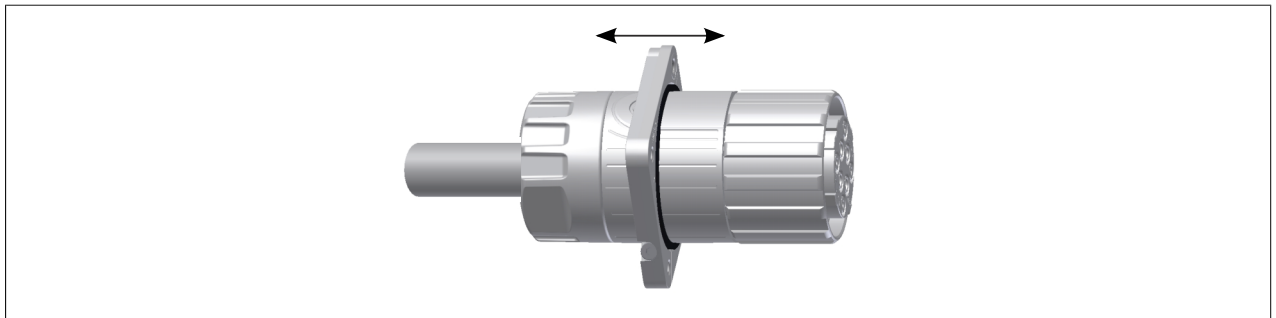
Attaching the metal flange to the connector (rear panel installation)
